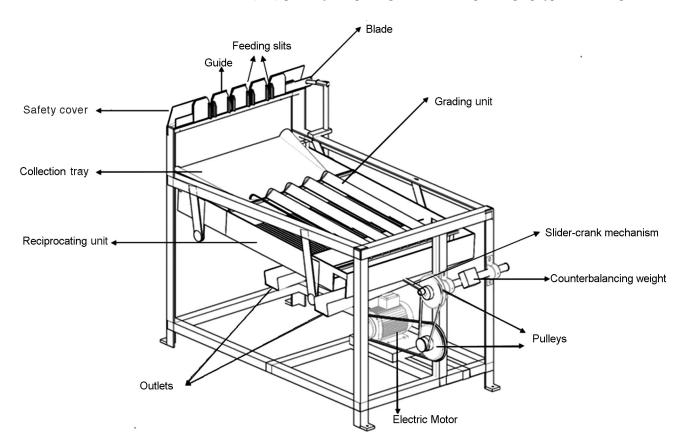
Angle view of AutoCAD 3-D line diagram of machine.
